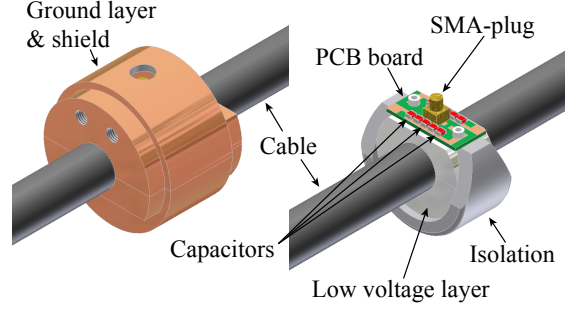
Sketches of the new divider design. Left: divider with covering shield; right: supporting rings with PCB board and capacitors.
